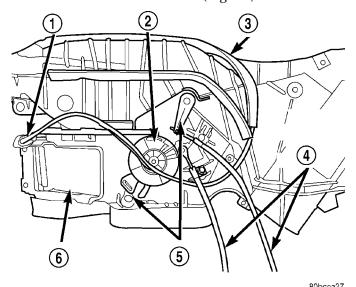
HVAC HOUSING CABLES - (TYPICAL)
